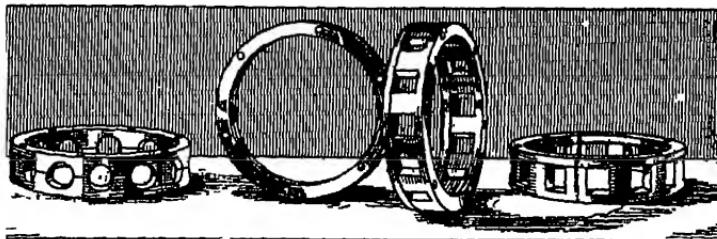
SHOWING CAGES FOR BALL AND ROLLER BEARINGS
